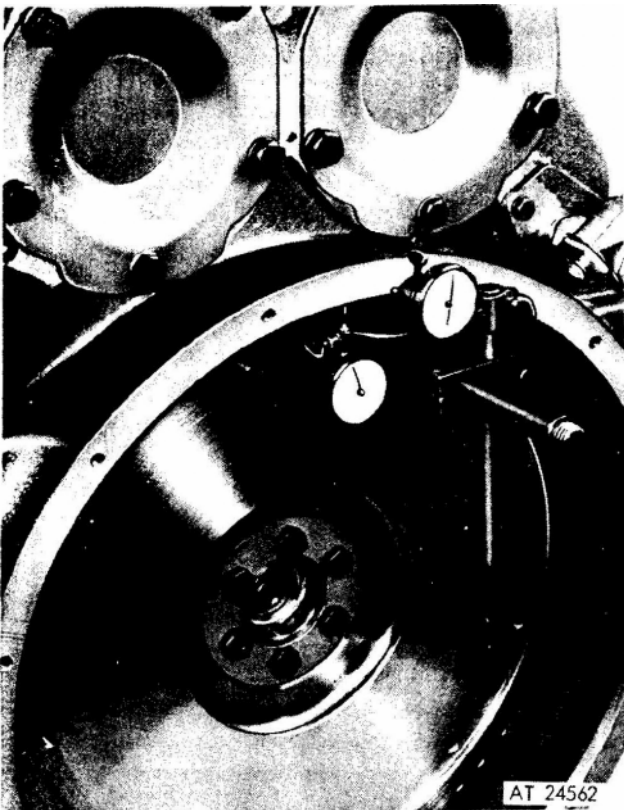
Checking flywheel housing concentricity with tool J 9737.
